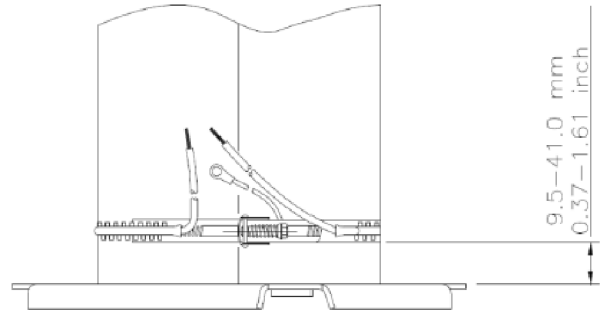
Crankcase Heater Location — 30RC035-060 Units
